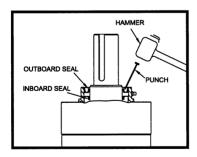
Piercing of Outboard Seal with Punch
